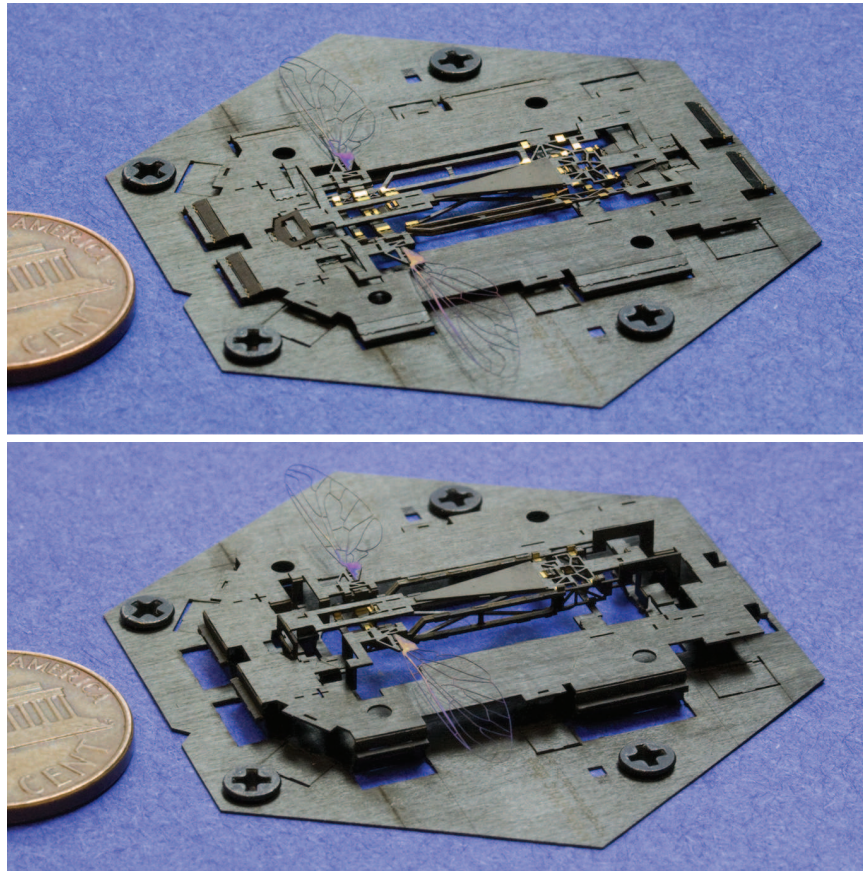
Pop-up assembly. Mobee is flat after fabrication (top). Separating the assembly scaffold plates (bot) executes pop-up assembly. A US penny provides scale.
